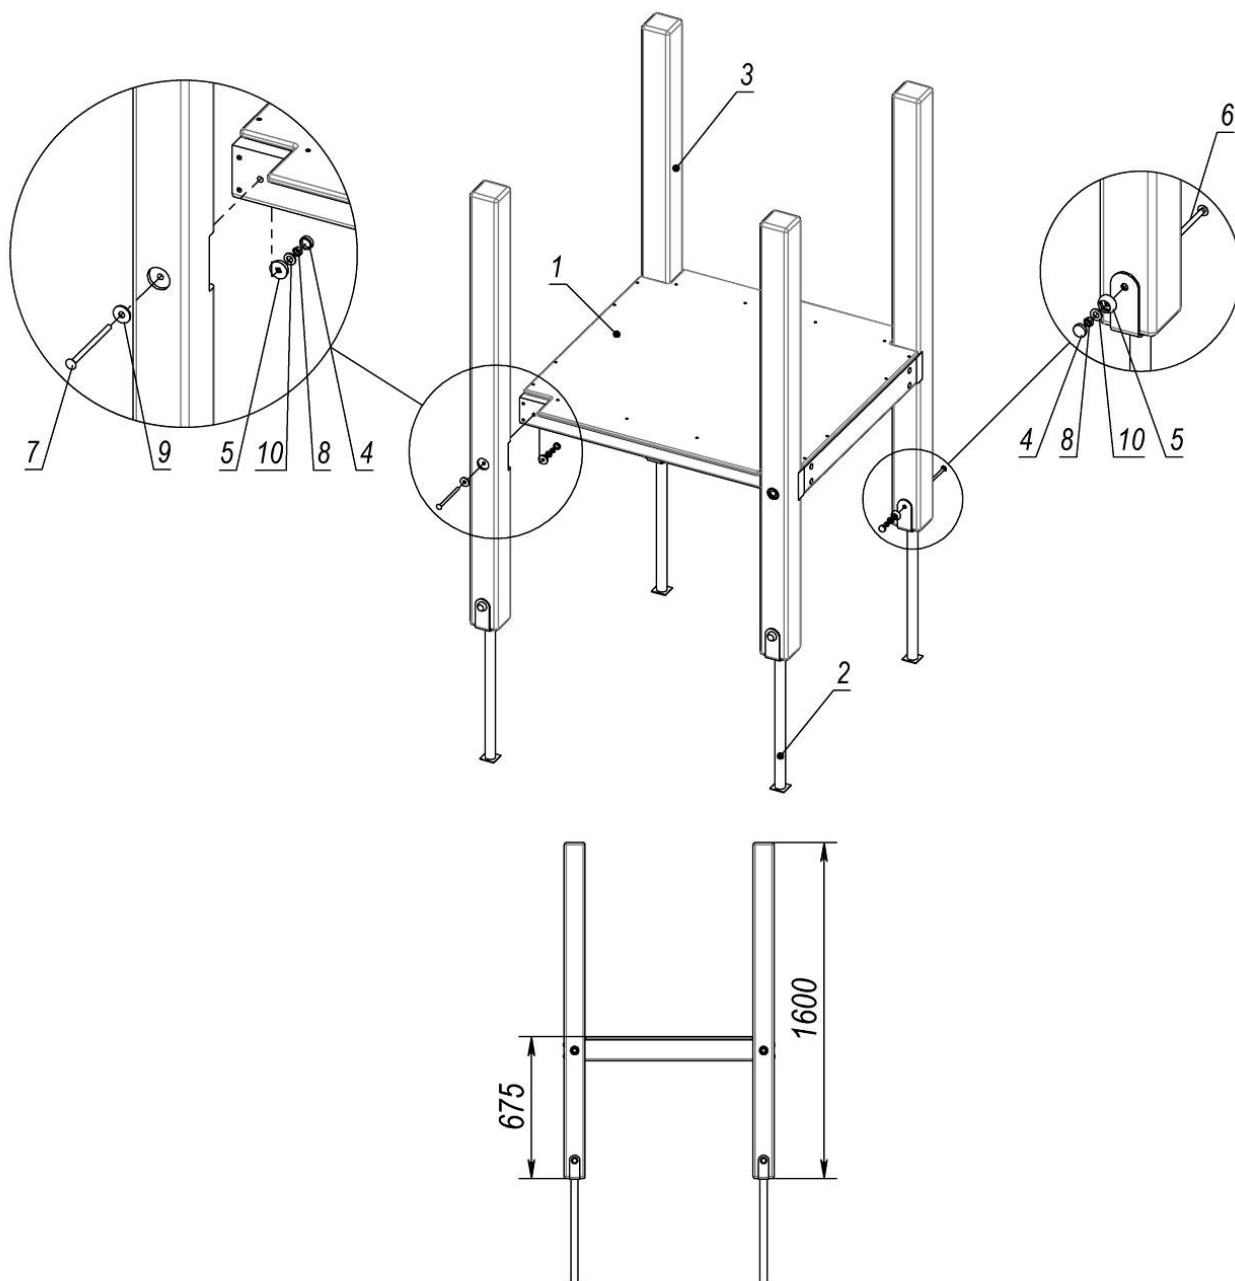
To simplify the assembly of the complex, we divide it into 7 parts!
